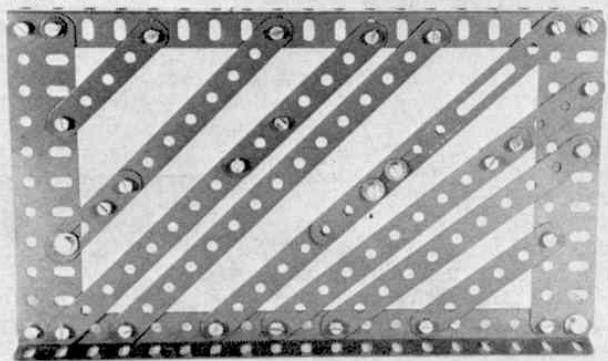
A demonstration assembly showing how elongated holes in Slotted Strips and other parts enable diagonally-mounted Strips to span inexact distances between anchoring points.
